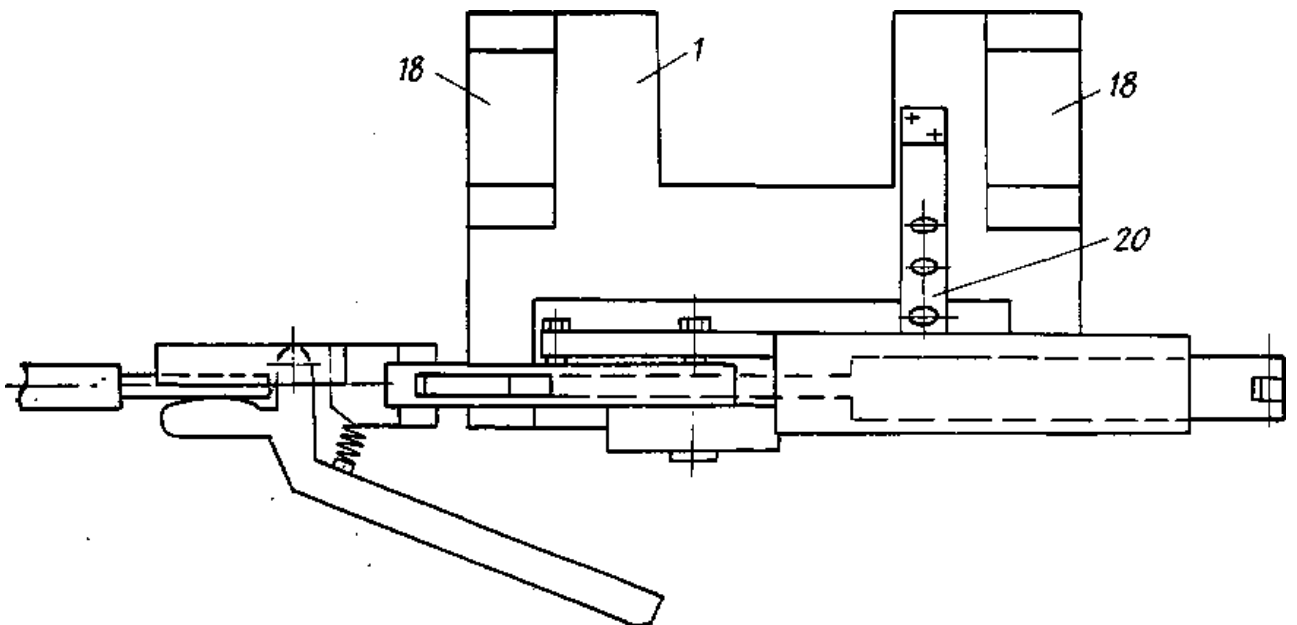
b – Device for welding with an inclined electrode top view
